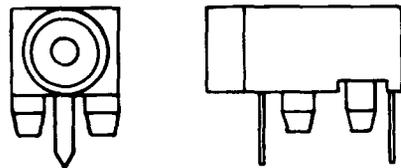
KS-19427, L8 Through L14, Pin Jacks
